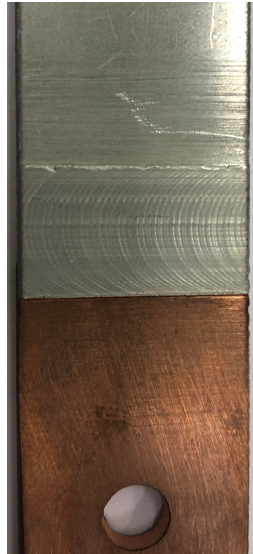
Front side of weld AA6101 with an outline in black of the test piece cut out
